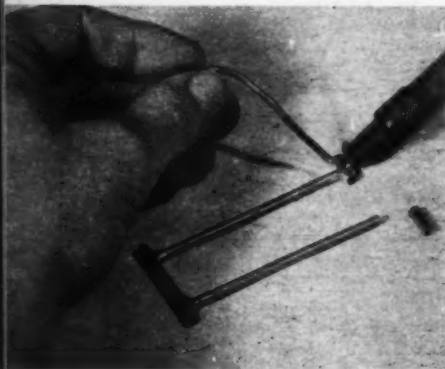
The rear axle, side rails of the frame, and the front axle "bearings" here are being carefully soldered into position.
